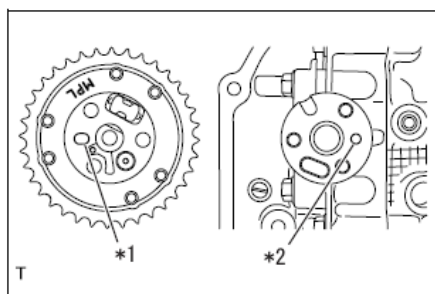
Securing Camshaft Timing Exhaust Gear Assembly Using SST
